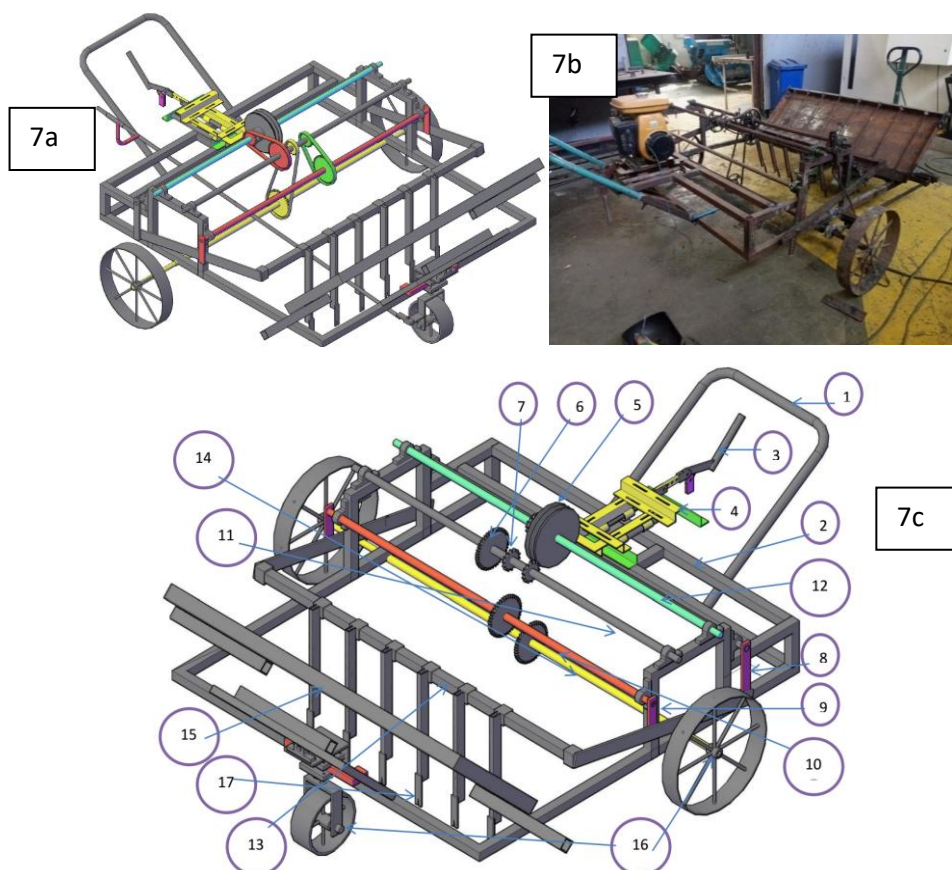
(a, b, c) - (a) CAD design and (b) the developed prototype; (c): CAD model of Teff transplanter and its components:
